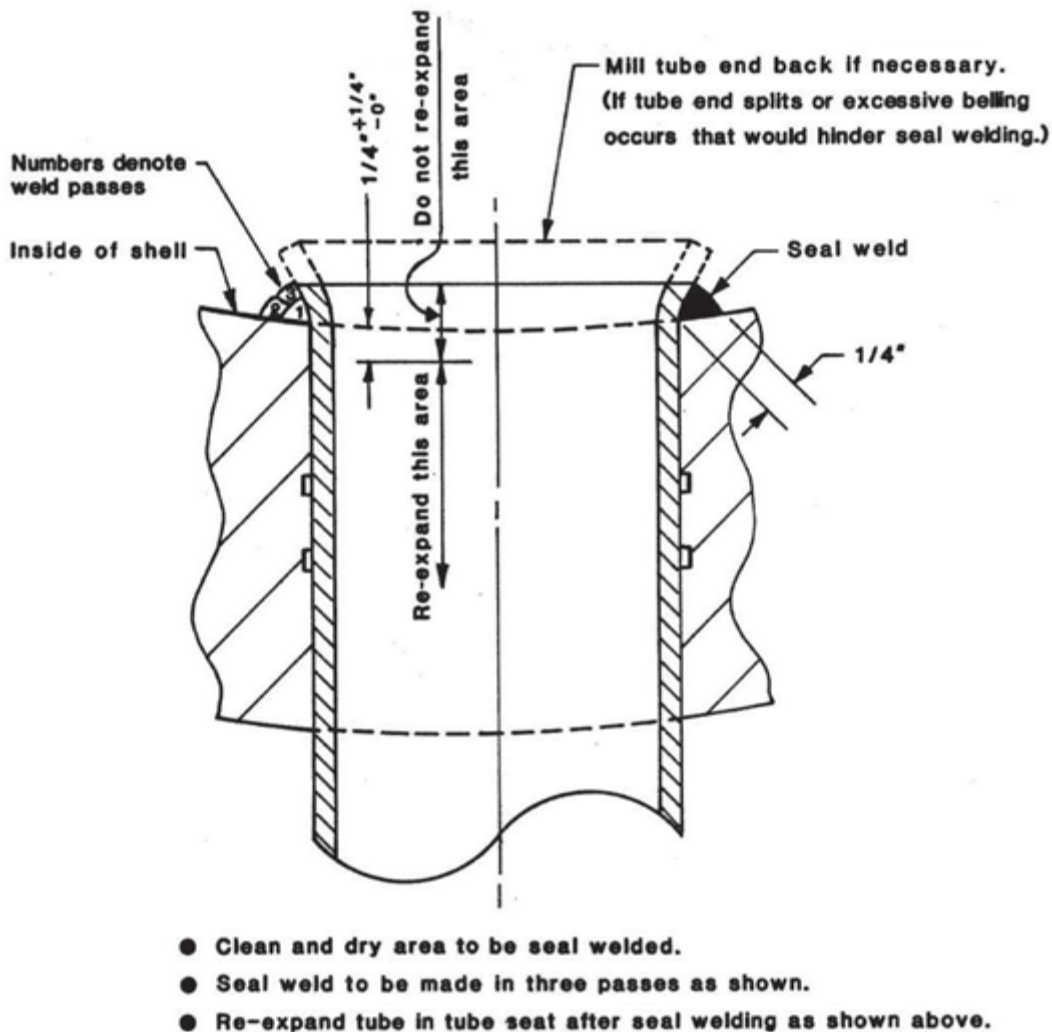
Seal Welding a Rolled Tube Joint
